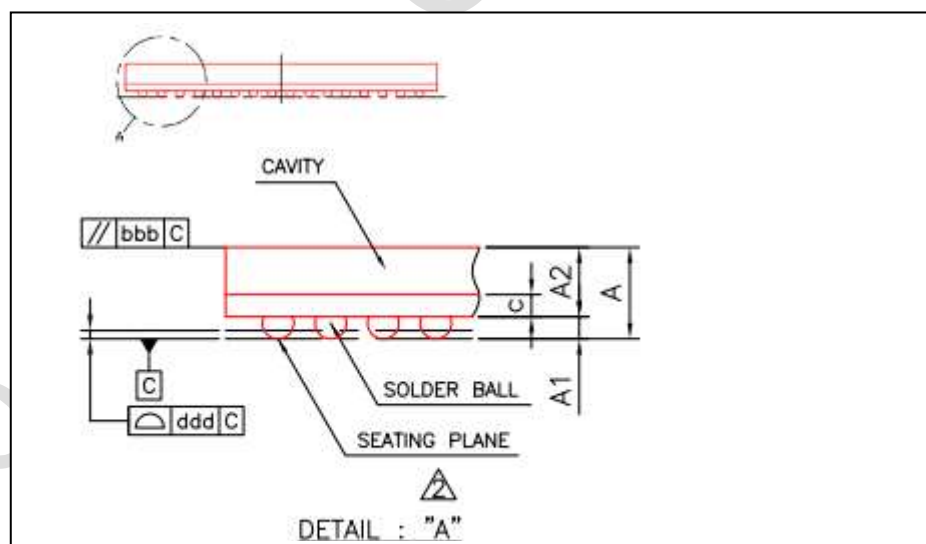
RK618 TFBGA(HF) Package Side View
